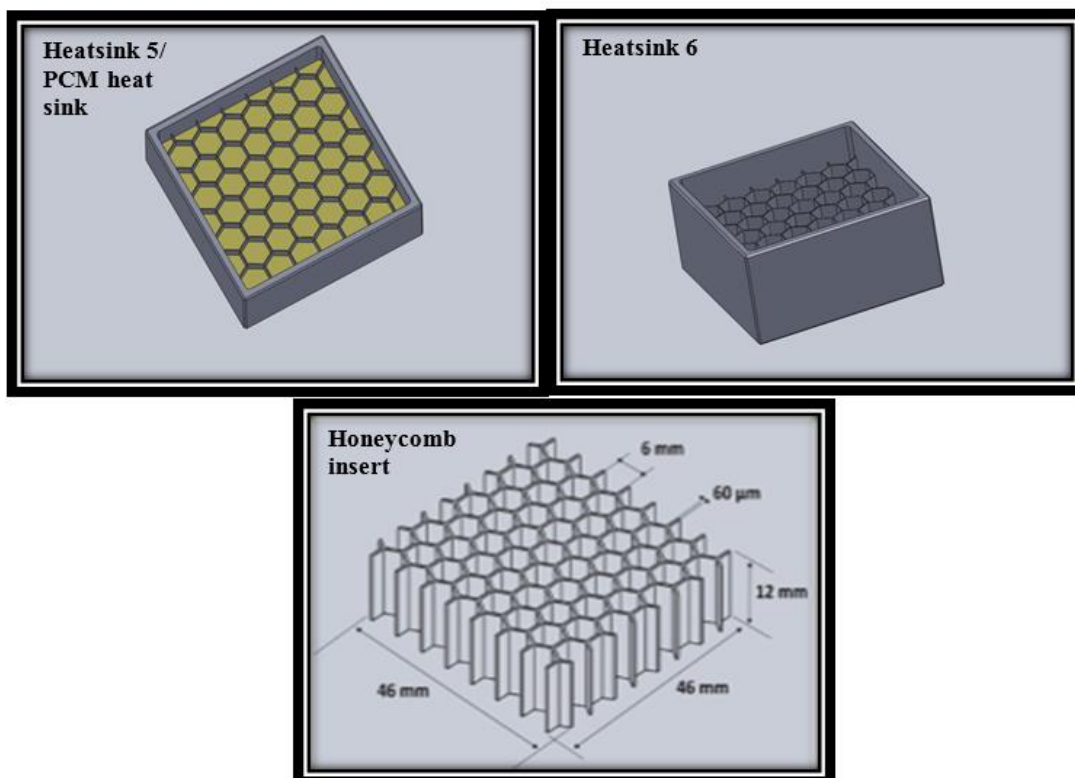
(b) Heat sinks 5 & 6 designs and dimensions of honeycomb insert
